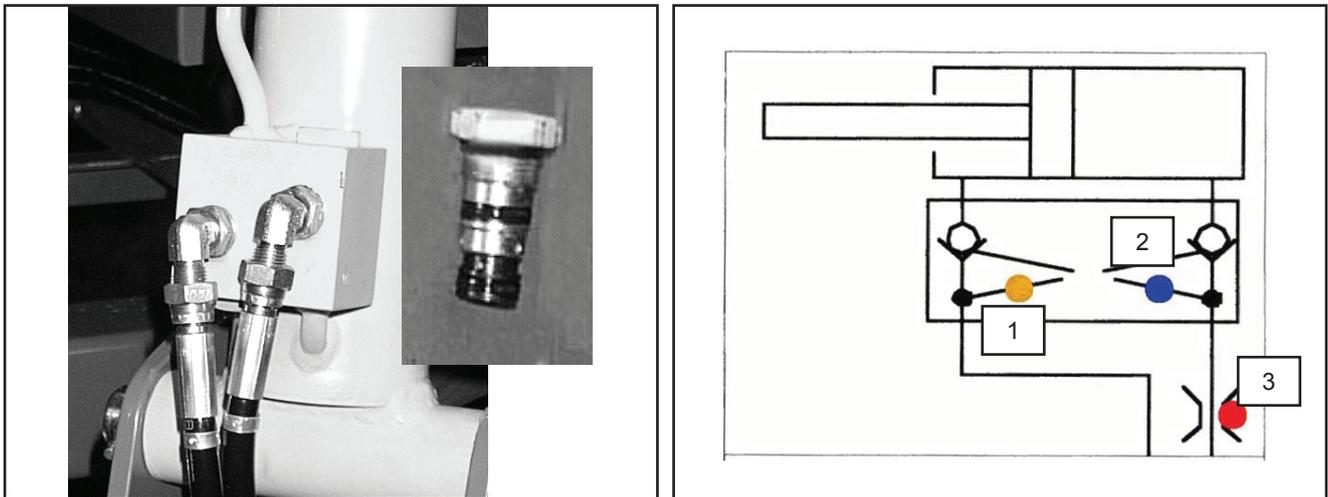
Outrigger cylinder with welded on block containing the two check valves. The restrictor shown is the hose adaptor fitted in the outrigger control valve.
